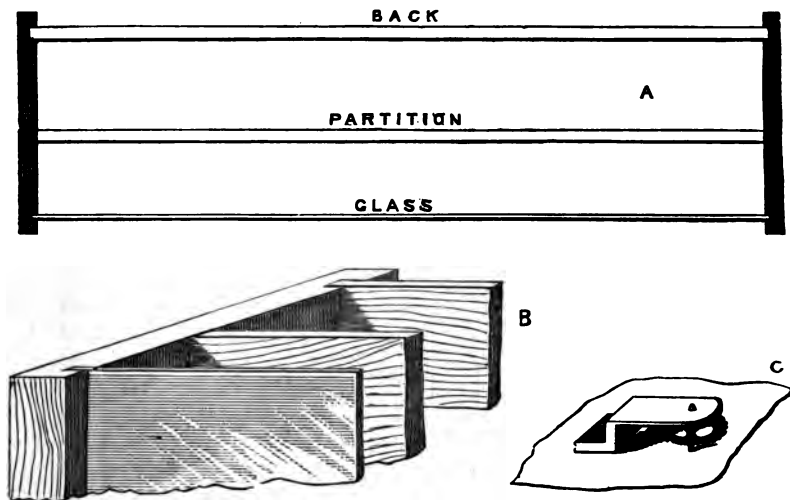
PLAN AND SECTION OF SAND TOY.
